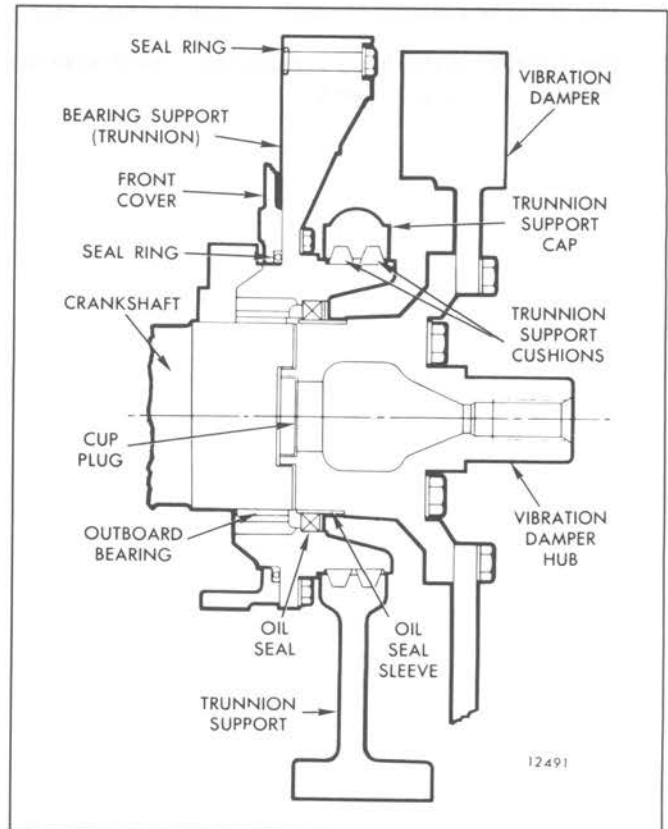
Outboard Bearing Support (Trunnion) Details
